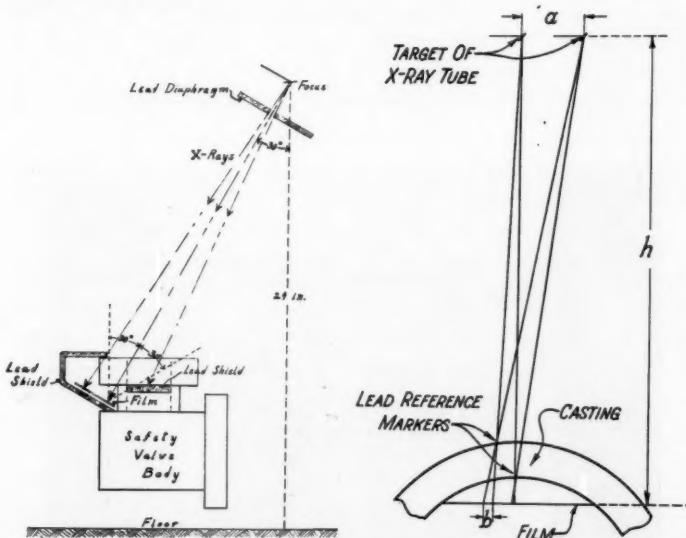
LEFT—DIAGRAM SHOWING EXPOSURE CONDITIONS FOR X-RAY INSPECTION OF A SAFETY VALVE BODY. FIG. 4—RIGHT—SET-UP USED FOR DOUBLE-EXPOSURE X-RAY METHOD TO SHOW DEPTH OF DEFECT.
